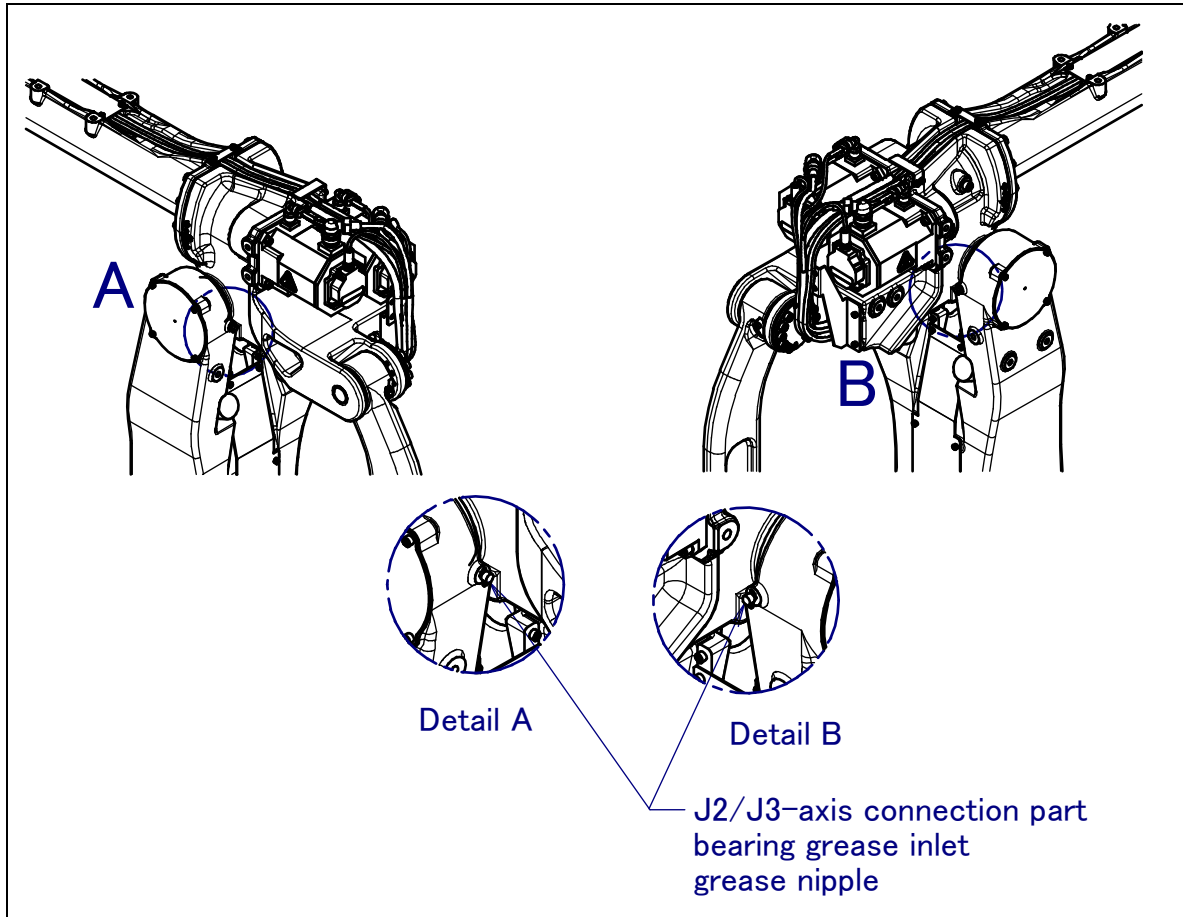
Greasing for J2/J3-axis connection part bearing
